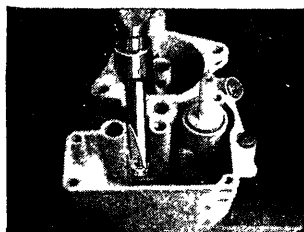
Install metering rod jet and gasket. If jet is worn, replace both metering rod and jet. Use new gasket
